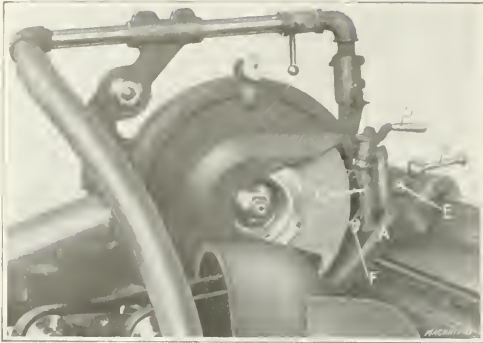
Another Radius Wheel Truing Device for Use on Norton Plain Grinding Machines
